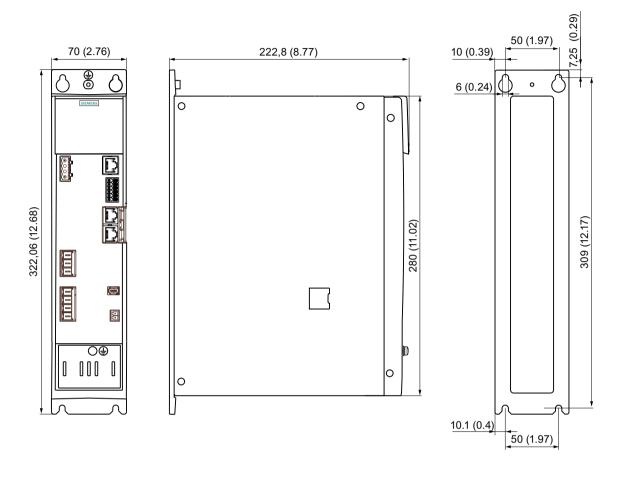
Dimension drawing SINAMICS S210 FSC, dimensions in mm (inches)
